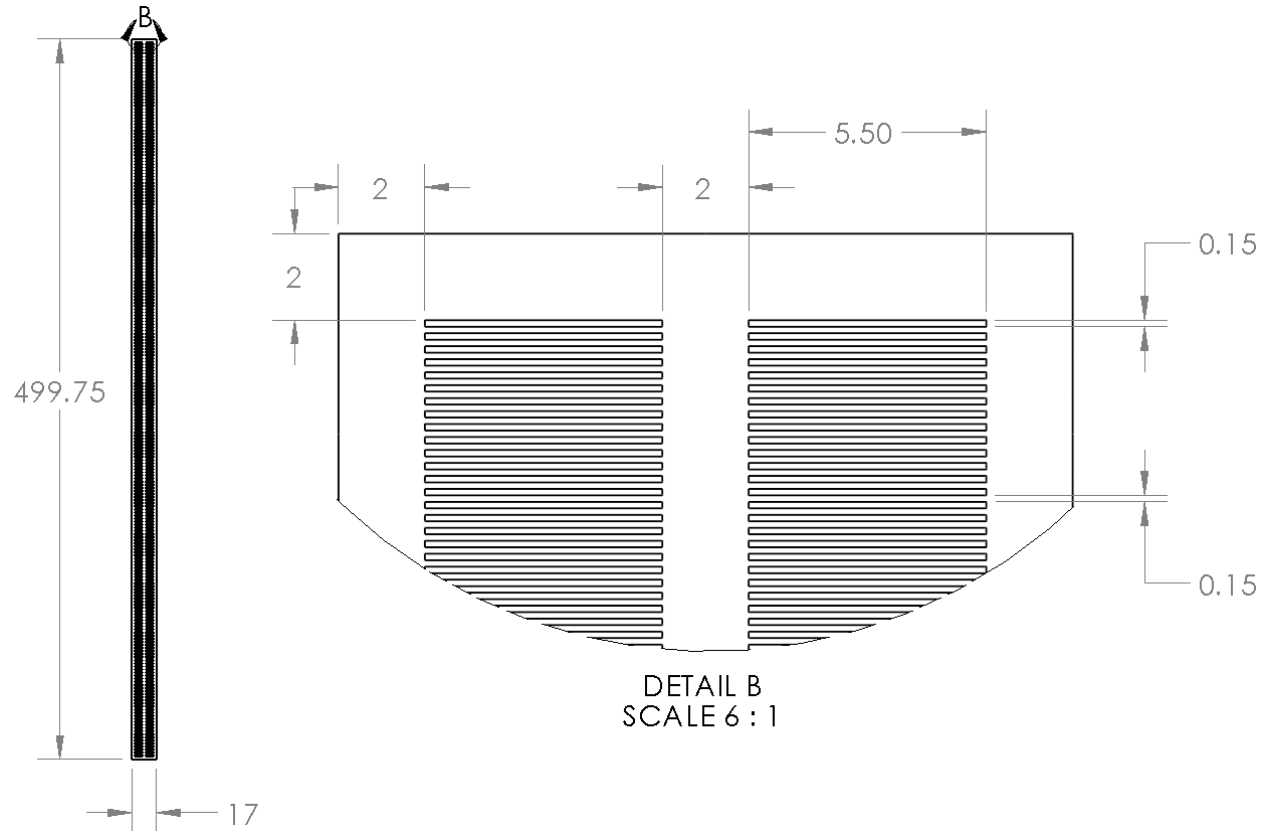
Drawing of a single plate of the lightest design. All dimensions are in [mm]. The design has 1653 slots per side.
